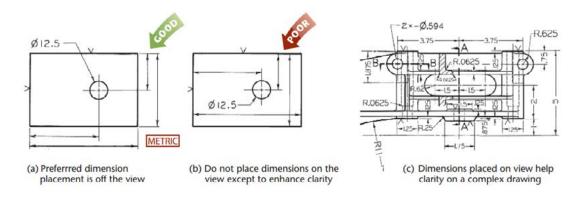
Place dimensions on view only when clarity is enhanced.
